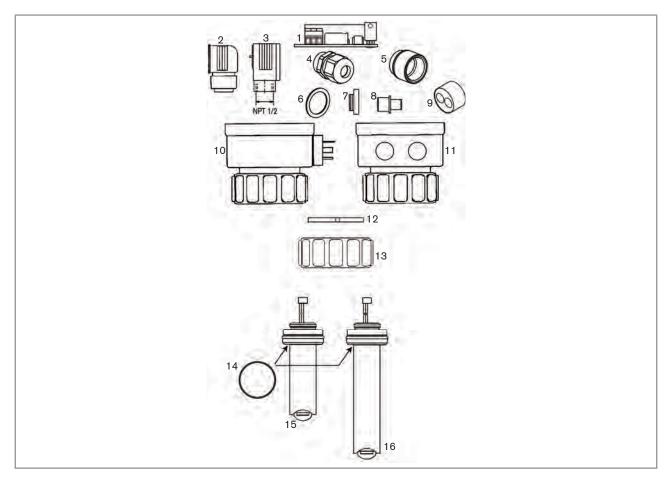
Exploded view of the spare parts of a 8025, compact version
